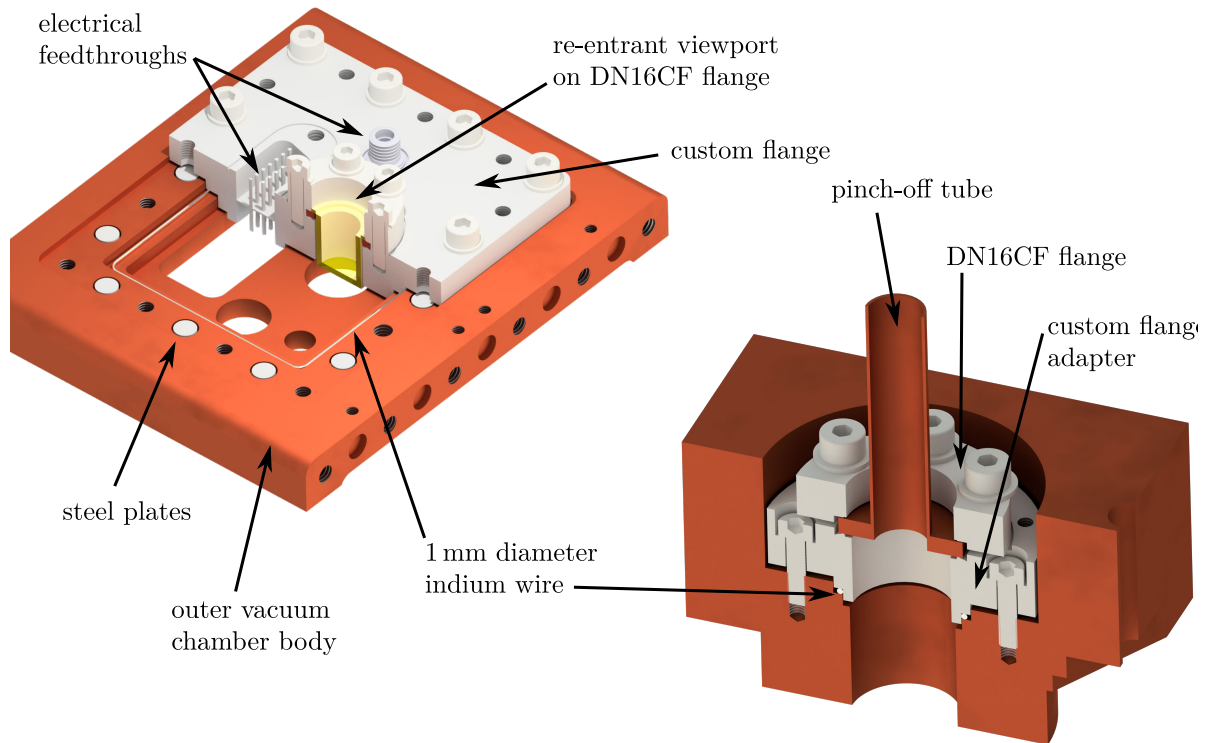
Two sorts of custom flanges connected to the inner chamber. Top left: Flange with welded-in electrical feedthroughs and a DN16CF knife edge to accommodate a re-entrant viewport. Bottom right: Adapter flange between the inner vacuum chamber and a DN16CF flange, in this case the port for the pinch-off tube.
